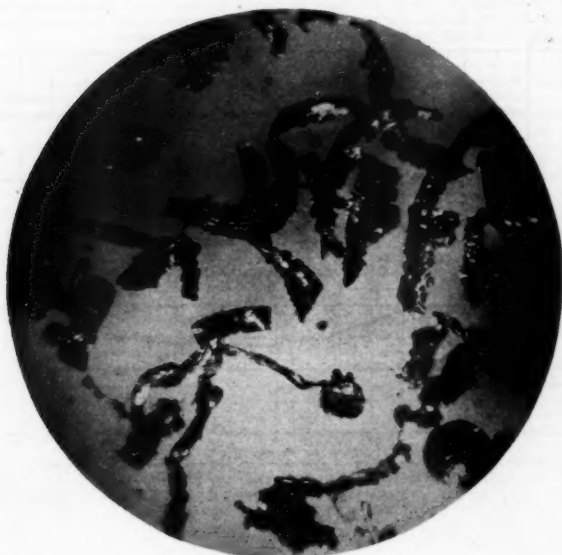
CHIPS FROM A PROPERLY OPERATING GRINDING WHEEL
